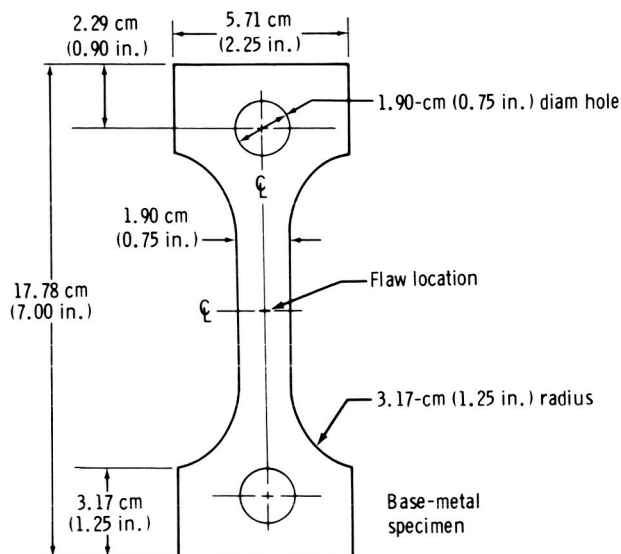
Inconel 718 cross-weld and base-metal specimen configuration for CGSS tank material tests.
